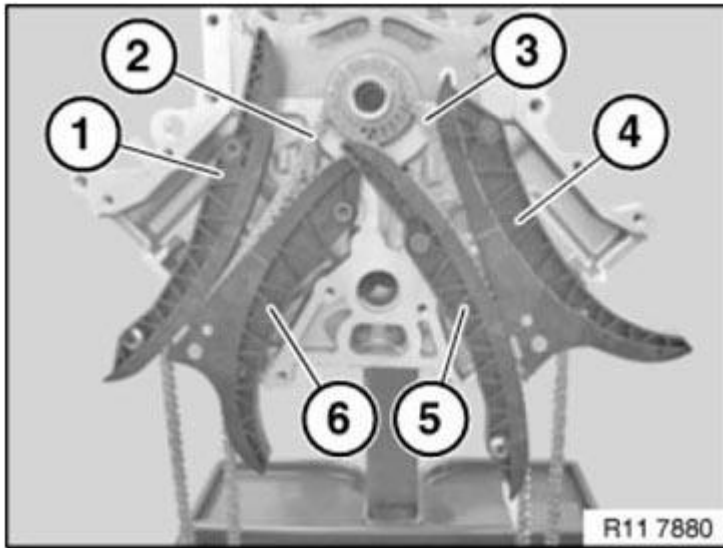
Identifying Guide Rail, Timing Chain And Tensioning Rail
